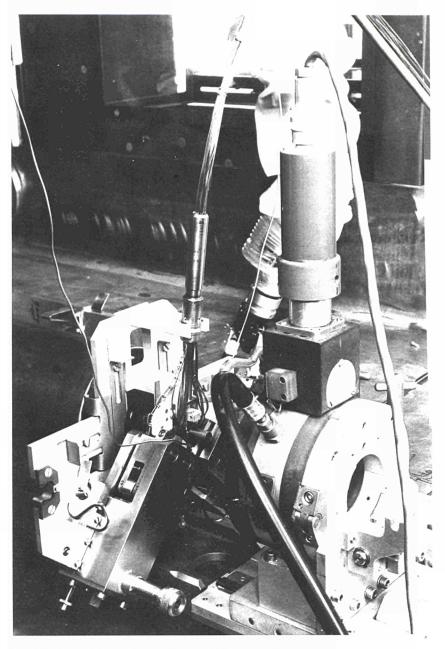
EUROS Cell. Preparing a welding test with a dummy capsule.
